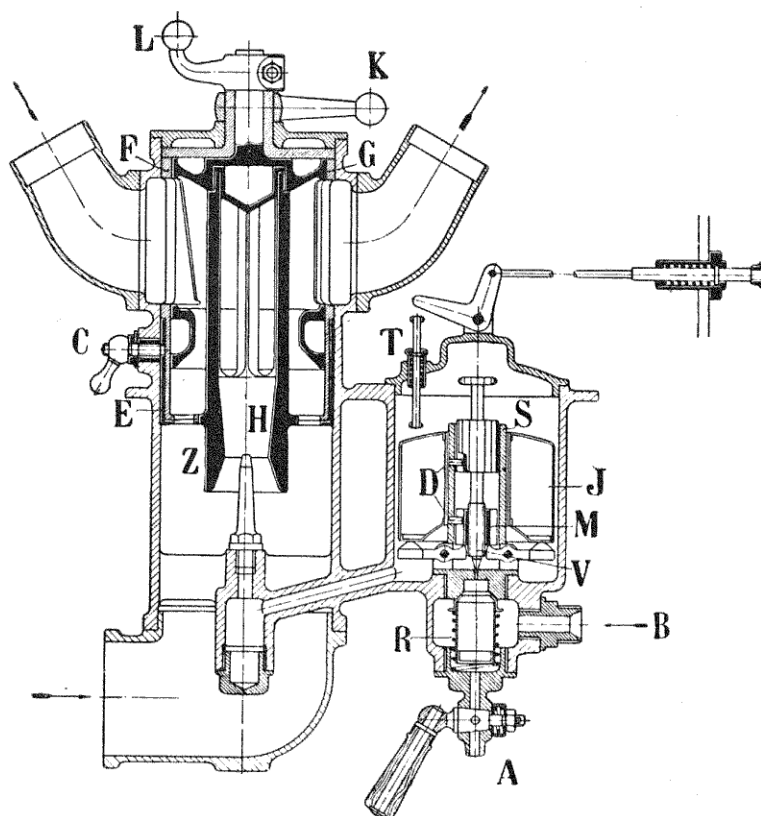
Automatic carburettor for automobiles of the Adler-Fahrradwerke, formerly Heinrich Kleyer, Frankfort-on-Main.
